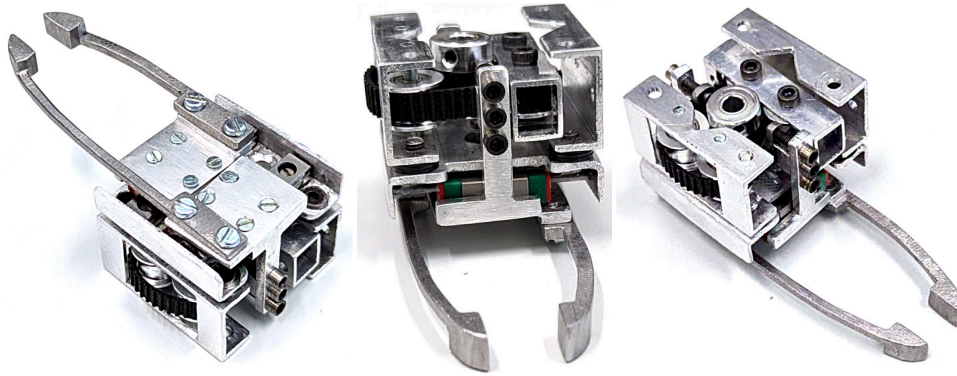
Gripper head before installing the motor and tensioning the drive belt.
